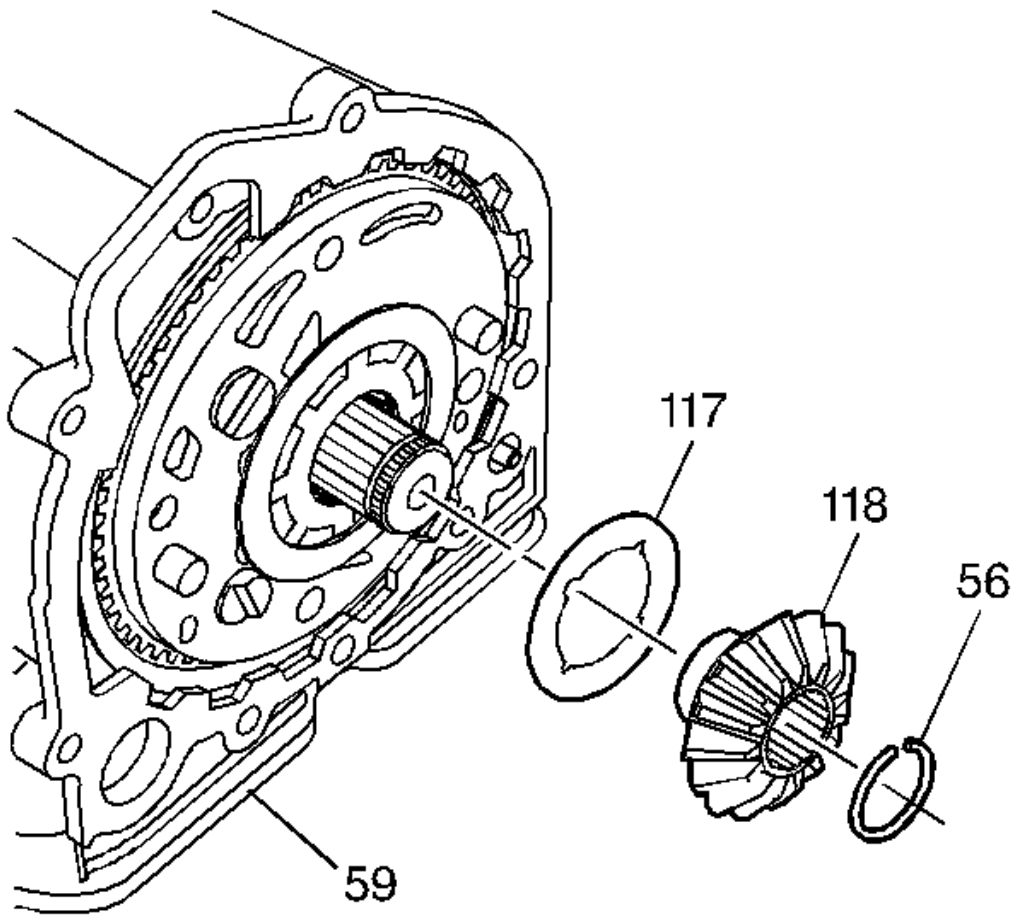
Identifying Output Shaft Snap Ring, Differential Side Gear, & Thrust Washer
